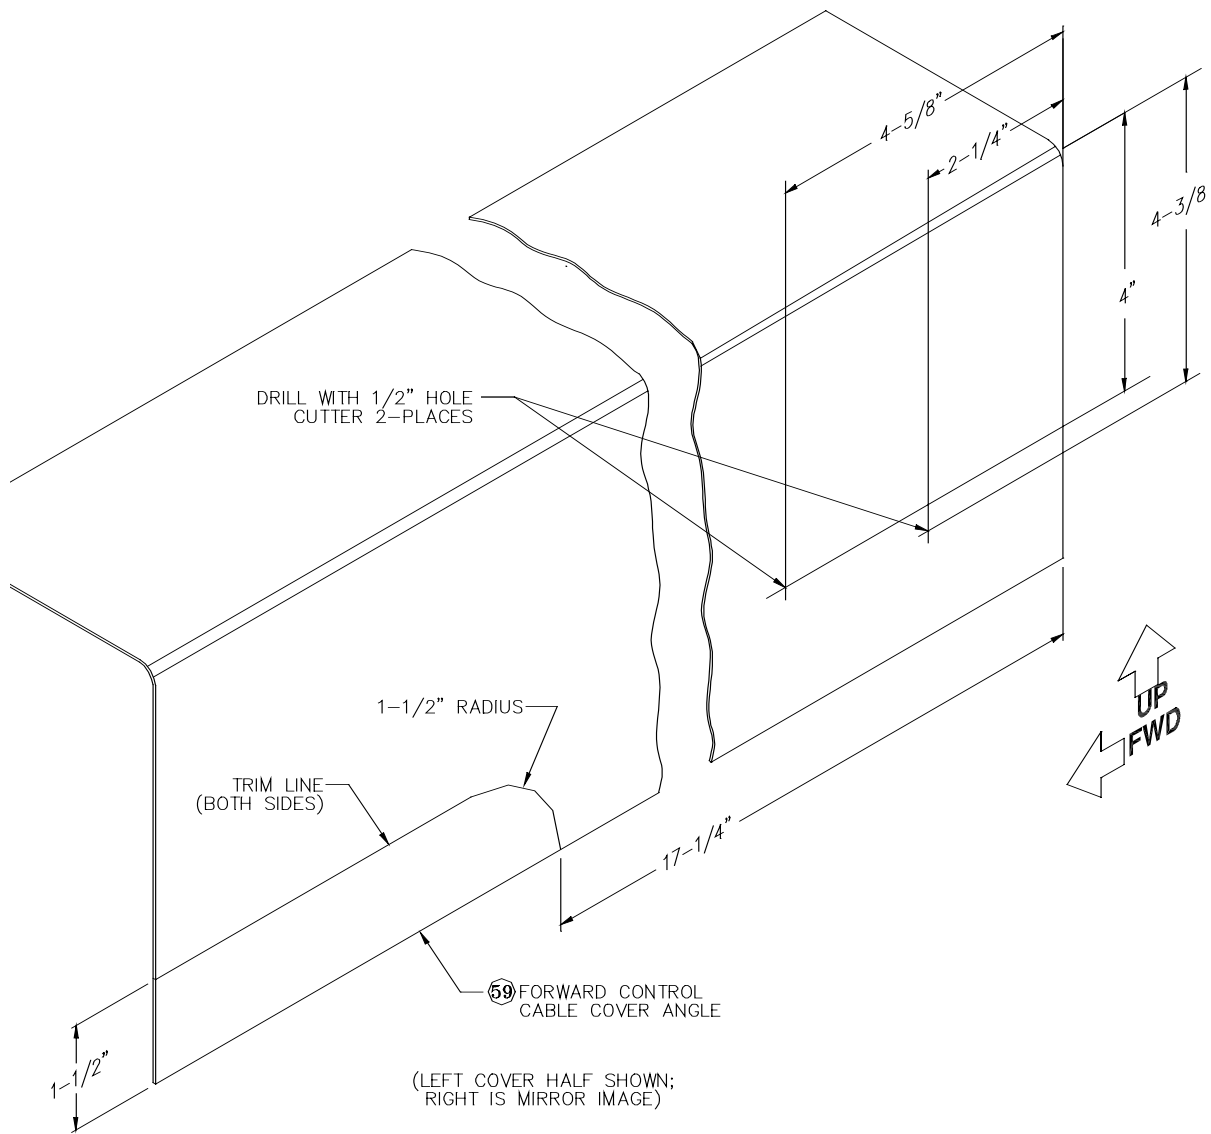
Trimming the Forward Control Cable Cover Halves to Clear the Rudder Control Weldments
